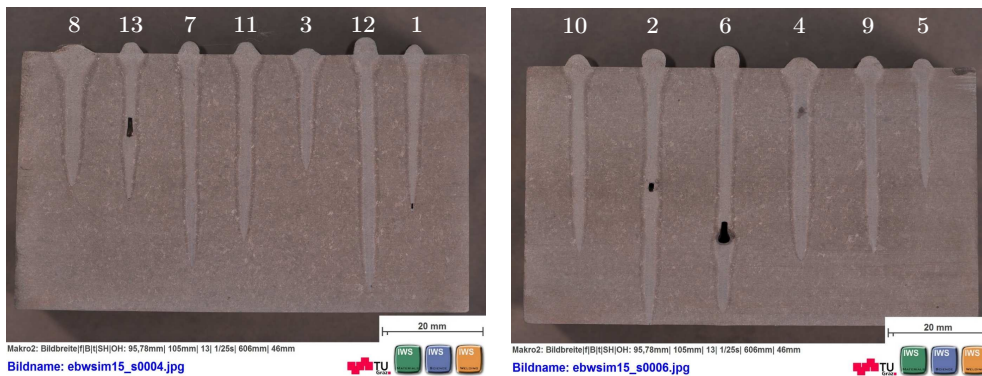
Section cut of bead on plate welds without beam oscillation through 1.4313 steel specimen; thickness ≈ 80 mm; Welding parameters according to Table 3.5
